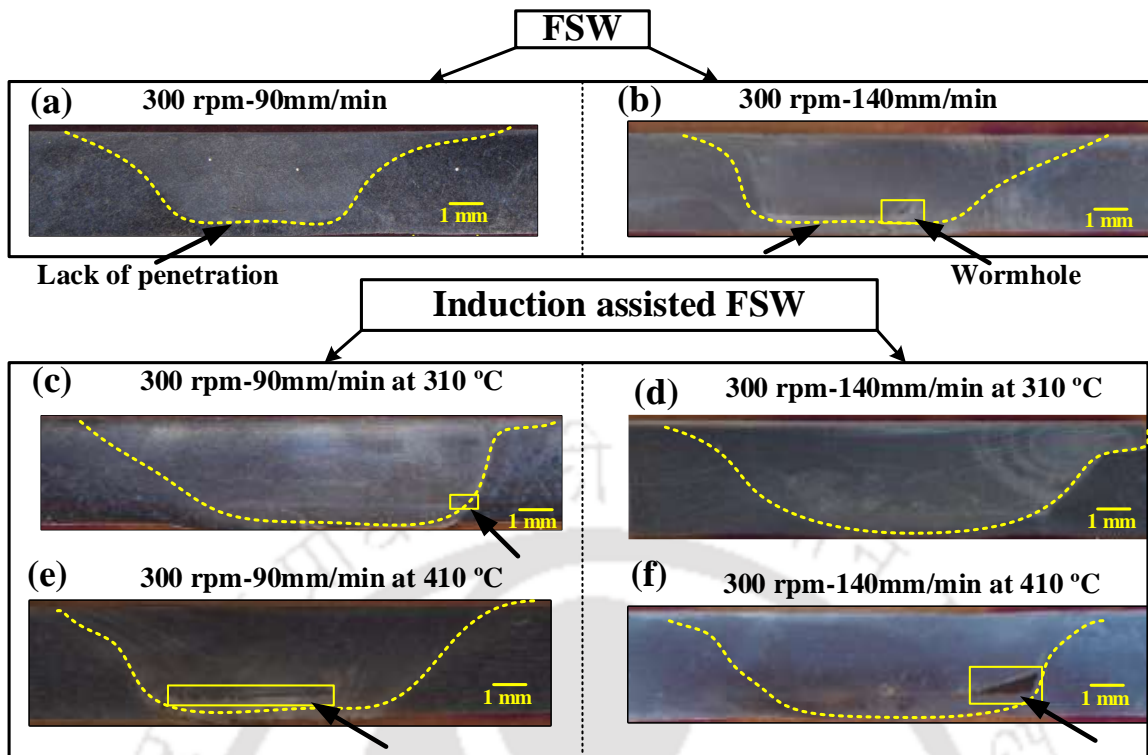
The cross-sectional macrostructure of the FS welds was obtained at (a-b) without and (c-f) with preheating
